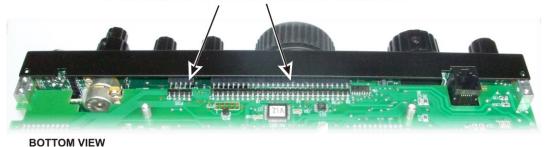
Mounting the Front Panel Assembly- Mating P30 and P35.
